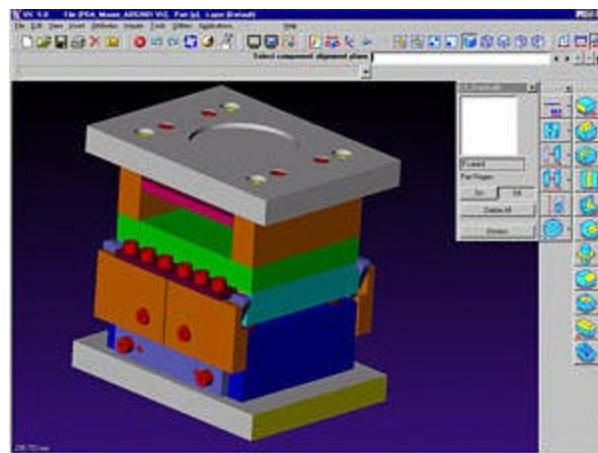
The selected standard mold base assembly and components are regenerated within VX Overdrive™ where custom modifications can be made. The complete mold design including the core/cavity blocks can be completed in Mold Edition and complete detail drawing packages can be generated with VX Drafting.
